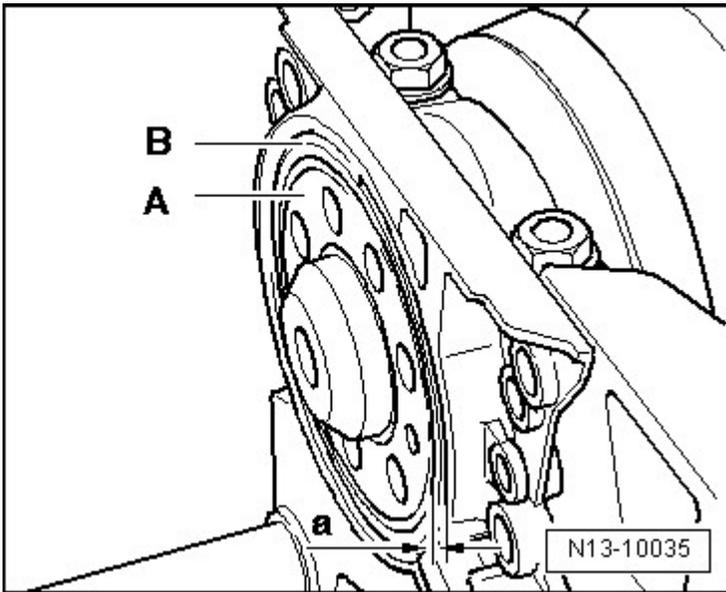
Identifying Installed Position Of Sensor Wheel On Crankshaft Is Exact
